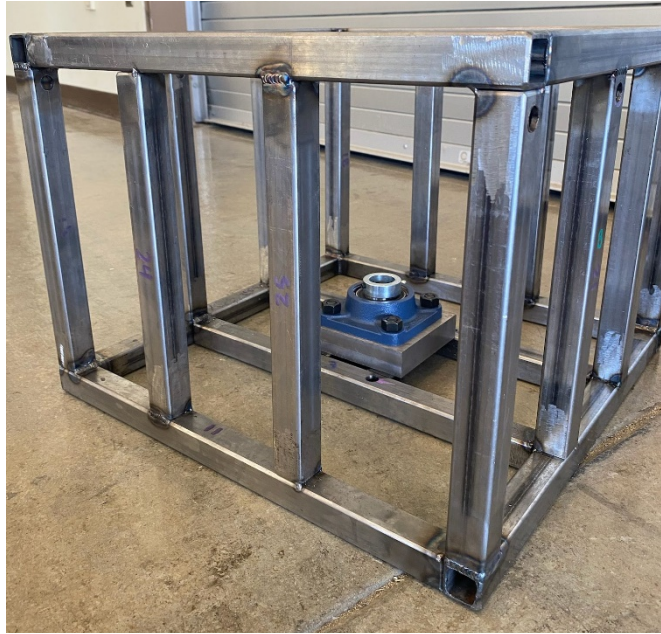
Welded chassis with modified lower bearing assembly.
